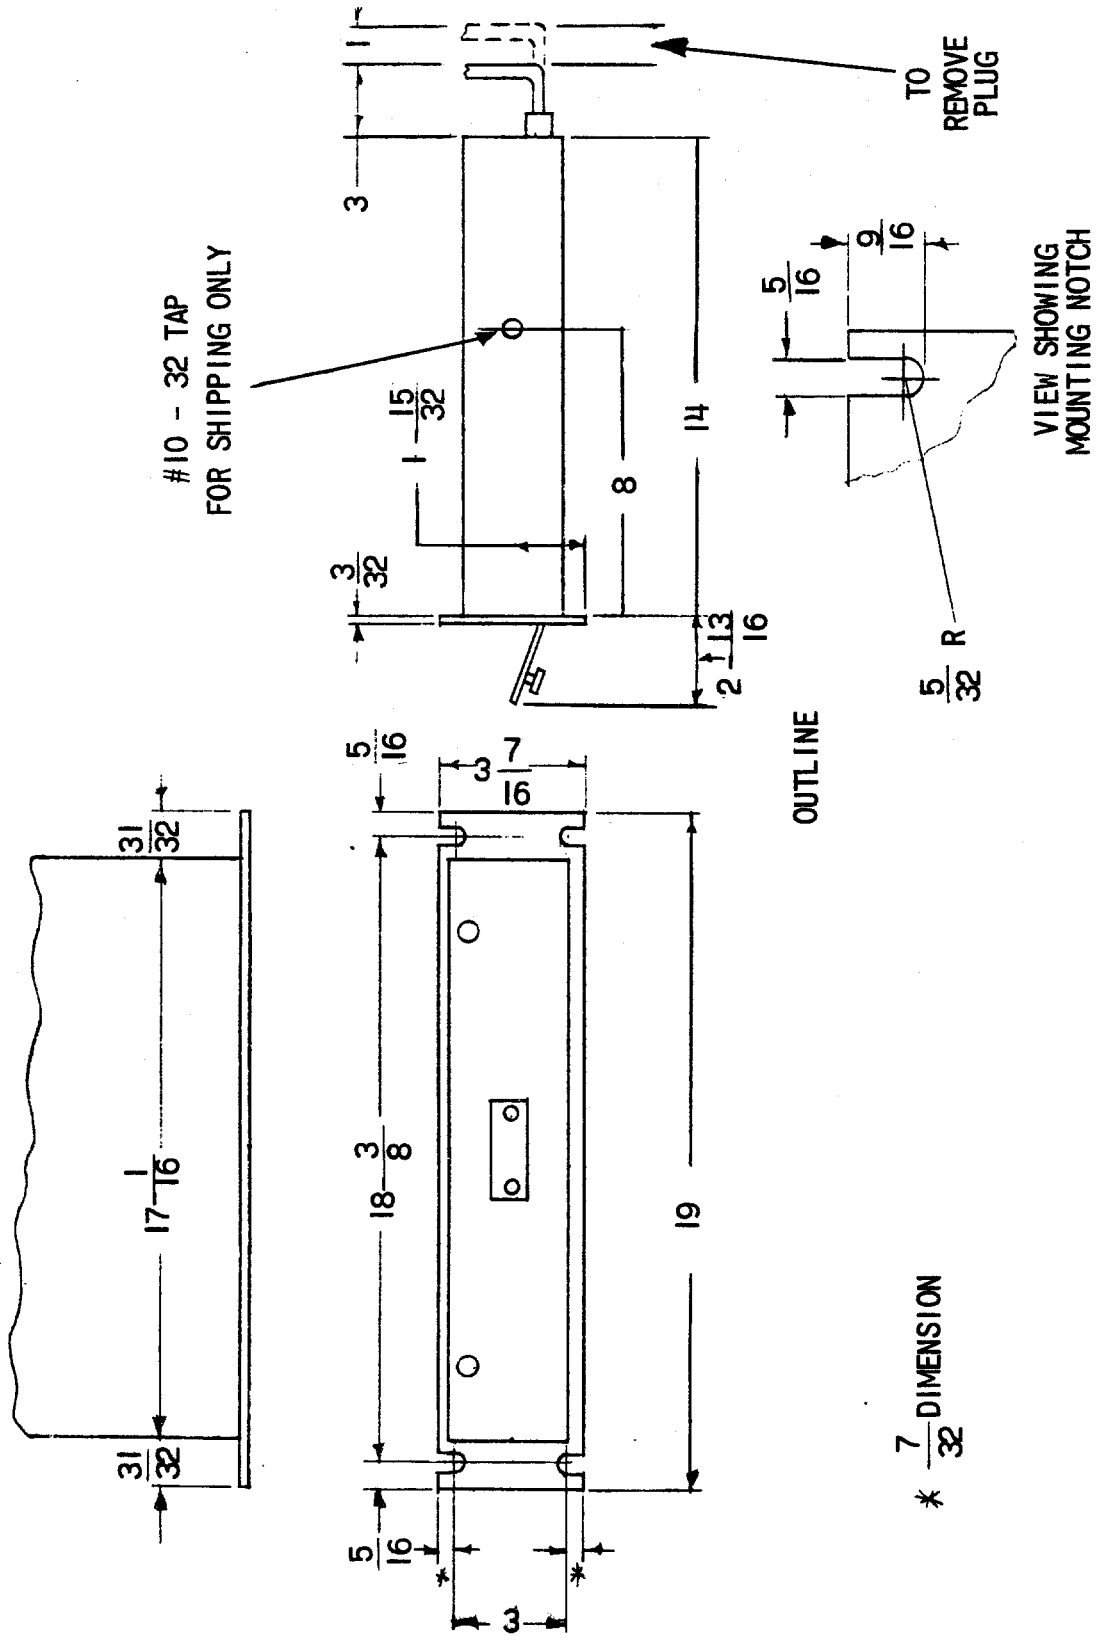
(0227A2036-0) Outline and Mounting Dimensions.
